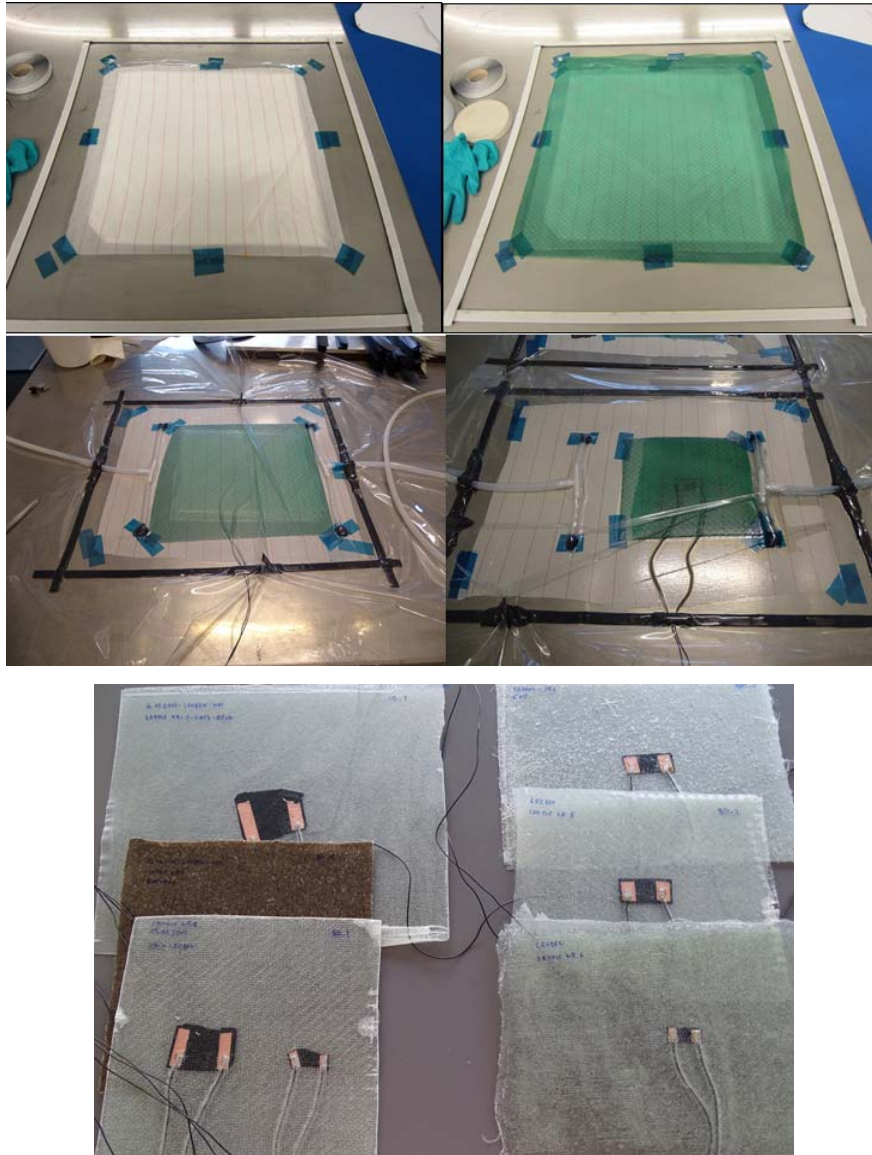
Vacuum infusion manufacturing process and manufactured laminates with integrated CNT's
